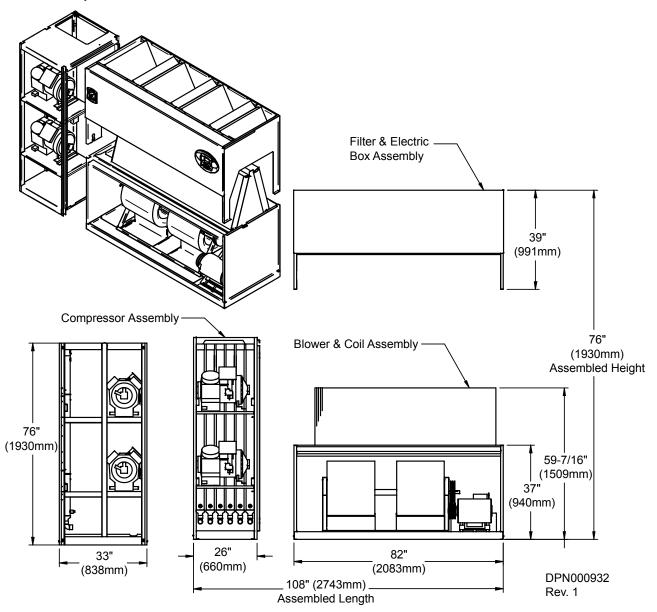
Component dimensions—downflow water/glycol, GLYCOOL, 53-77kW (15-22 ton), all compressor models
